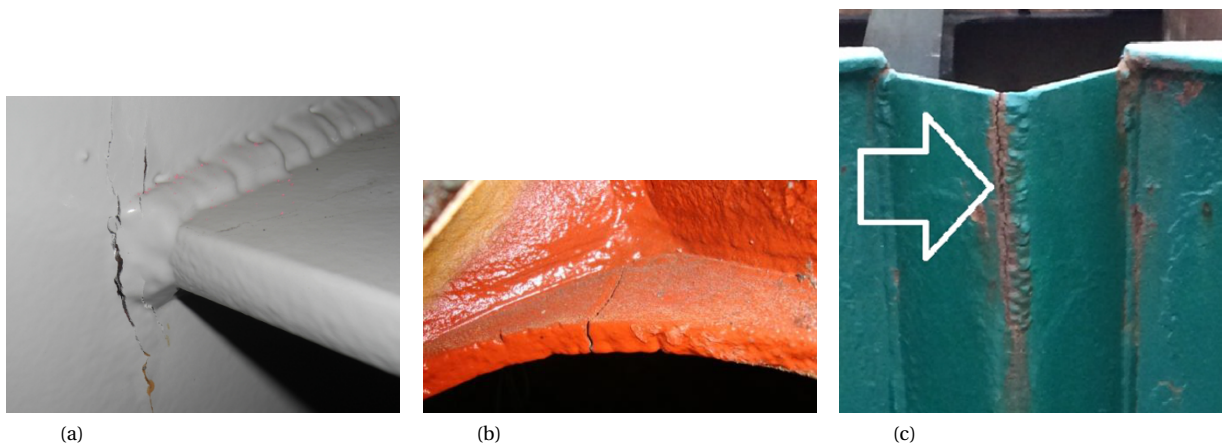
(a) Crack in welded detail hopper corner area, (b) Crack in base material hopper corner area, (b) Crack in weld coaming area
